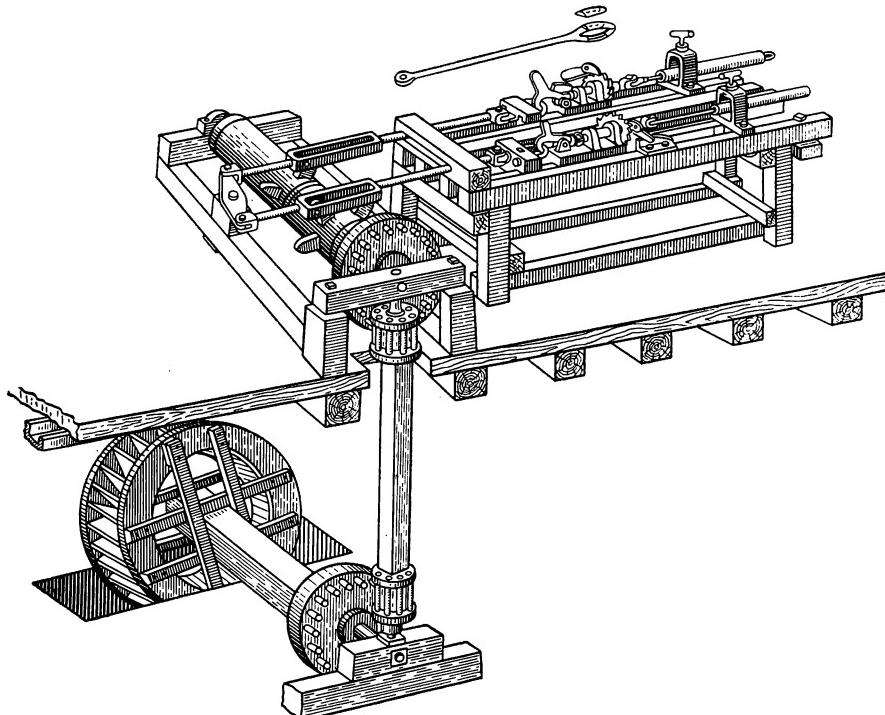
A part of the "rubbing" machine devised and built by Yakov Batishchev in 1715
